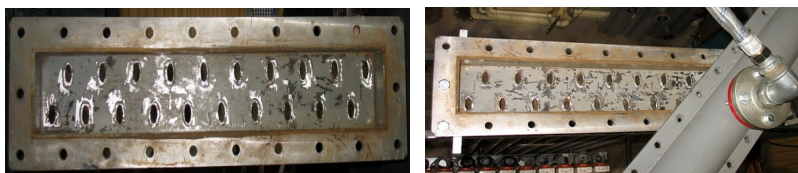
View of the sieve plate at the assembly stage of the inlet header.
